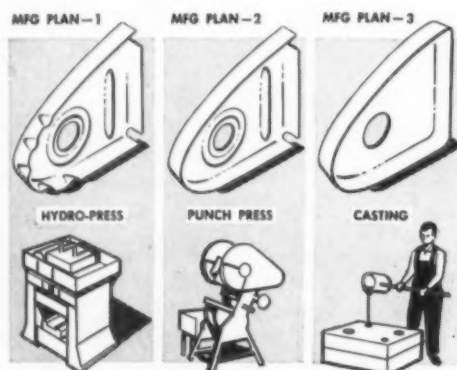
Pawl for latch assembly with manufacturing processes estimating sheet for outlining preliminary fac
